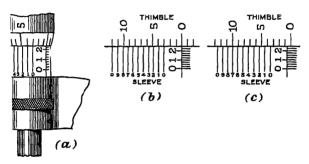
Illustrating Method of Reading a "ten-thousandth" Micrometer Caliper
